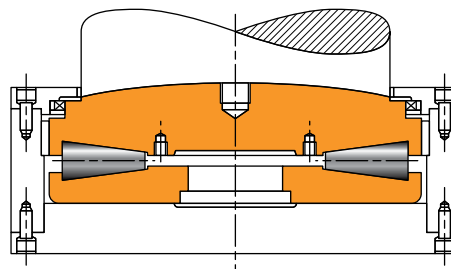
Typical screwdown support configuration using a TTHDSX thrust bearing.
